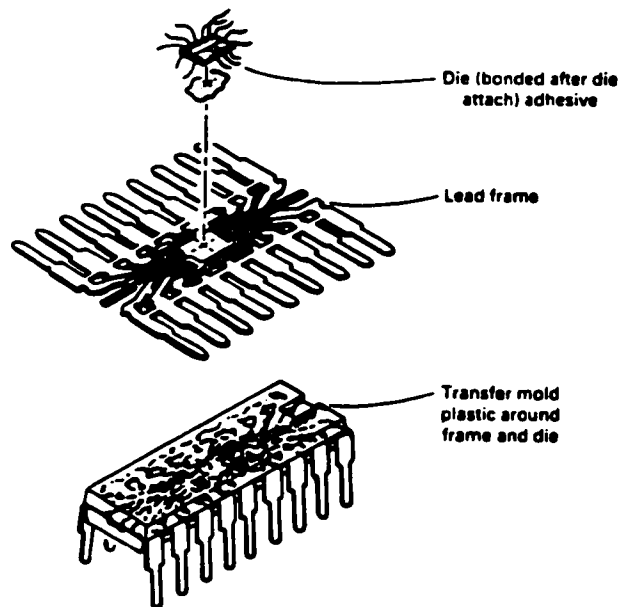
Schematic illustration of die attach followed by transfer molding [6].
